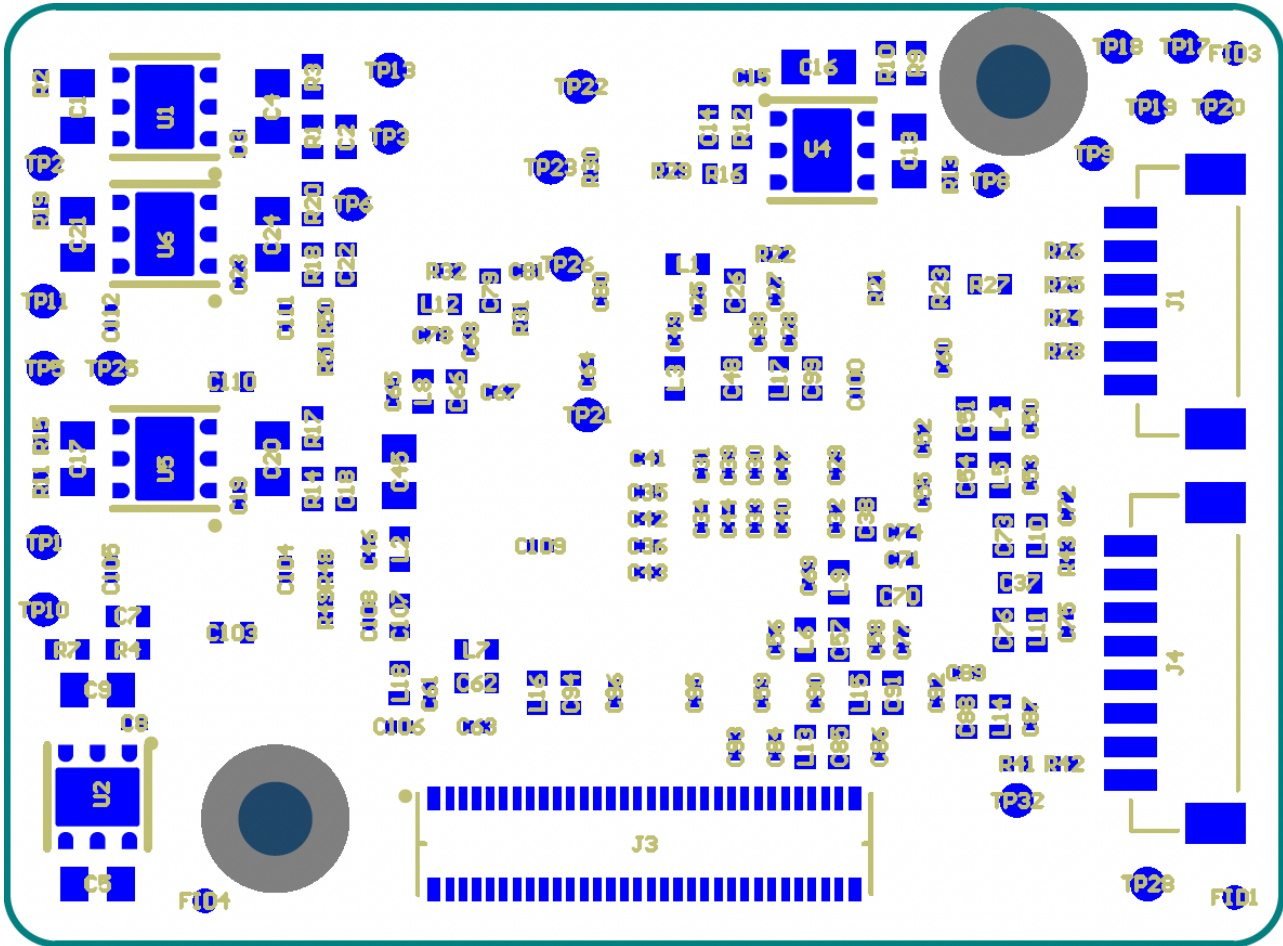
Schematic view of the FSM-IMX636 Devkit FSA rear.
